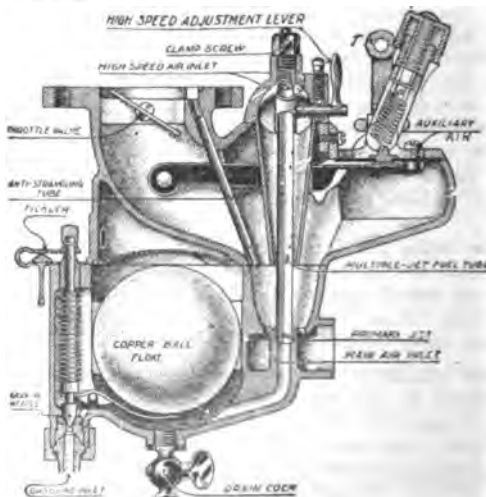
The Carter; a true Multiple Jet Type carburetor with side float chamber. Seamless copper float. Auxiliary air valve spring subject to control from the car dash. This type is particularly adapted to six cylinder engines.
